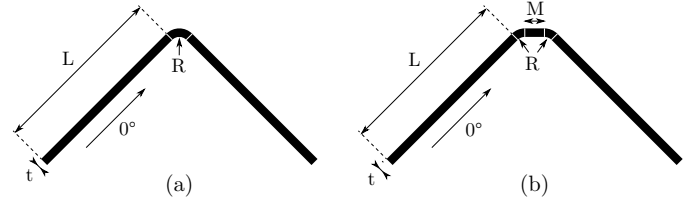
(a) L-shaped specimen geometry (b) M-shaped specimen geometry
